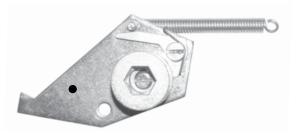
NEW SPRING PLATE ASSEMBLY
